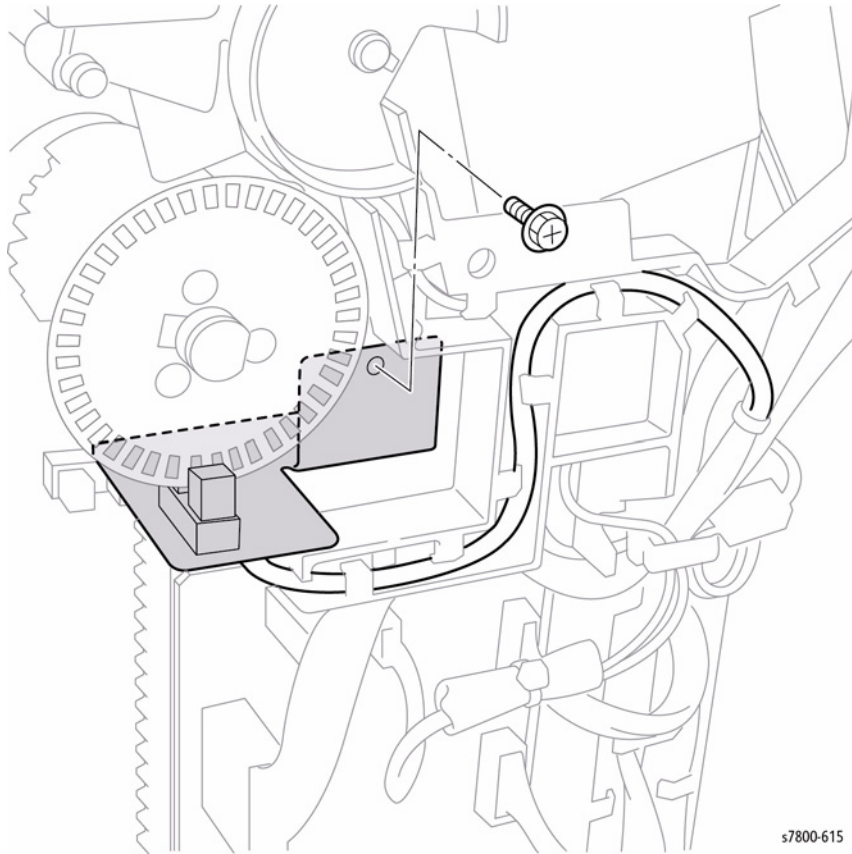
Removing the Stacker Encoder Sensor and Bracket
